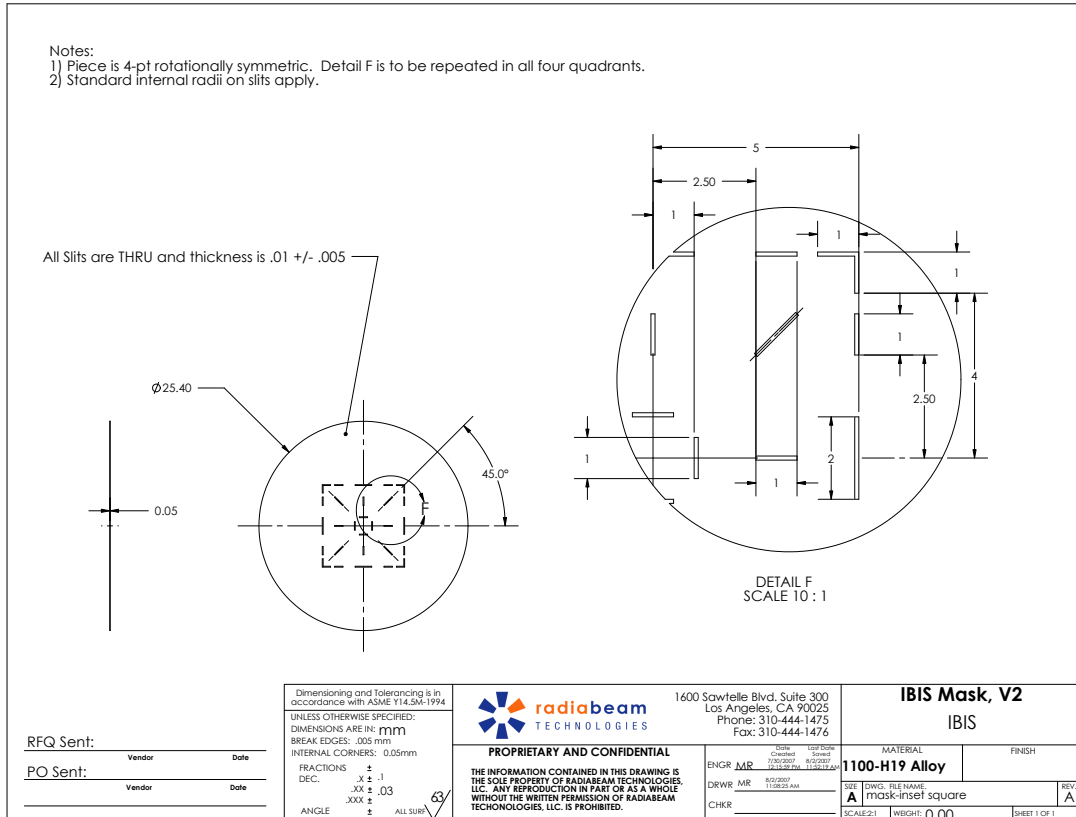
CAD drawing, provided by Radiabeam Technologies, of the aluminum mask
